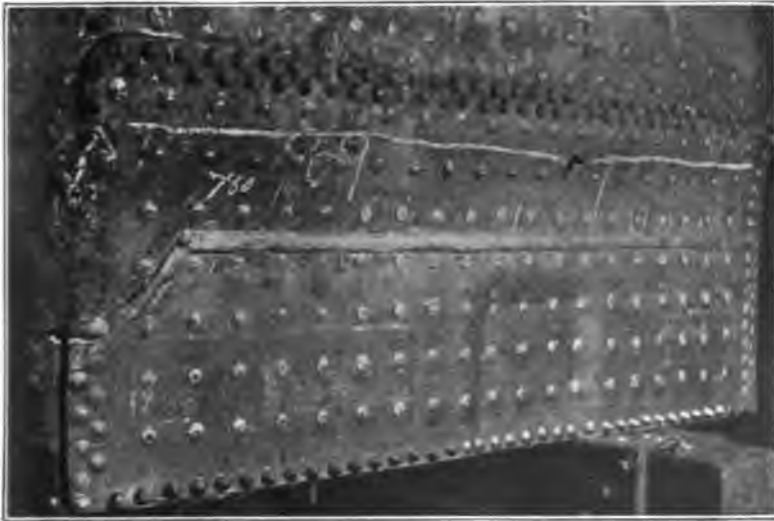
Boiler Side Sheet Welded by Electric Welding Apparatus
